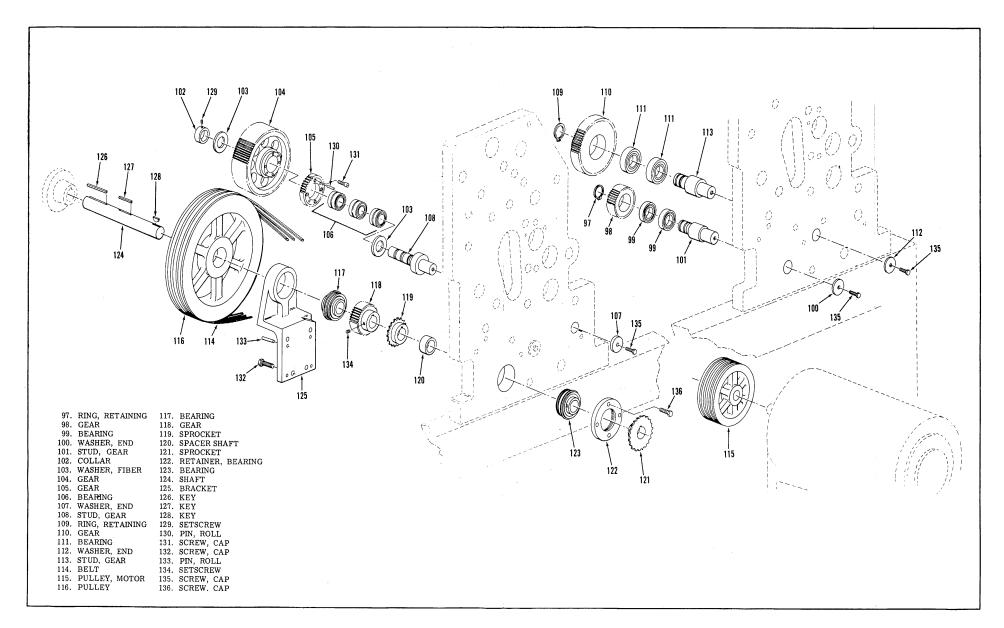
[°]. Cylinder and main drive assembly, exploded view.
